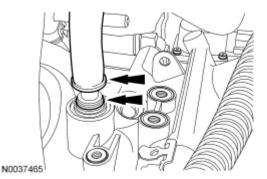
Locating Locking Ring And Brake Booster Vacuum Supply Tube Courtesy of FORD MOTOR CO.
